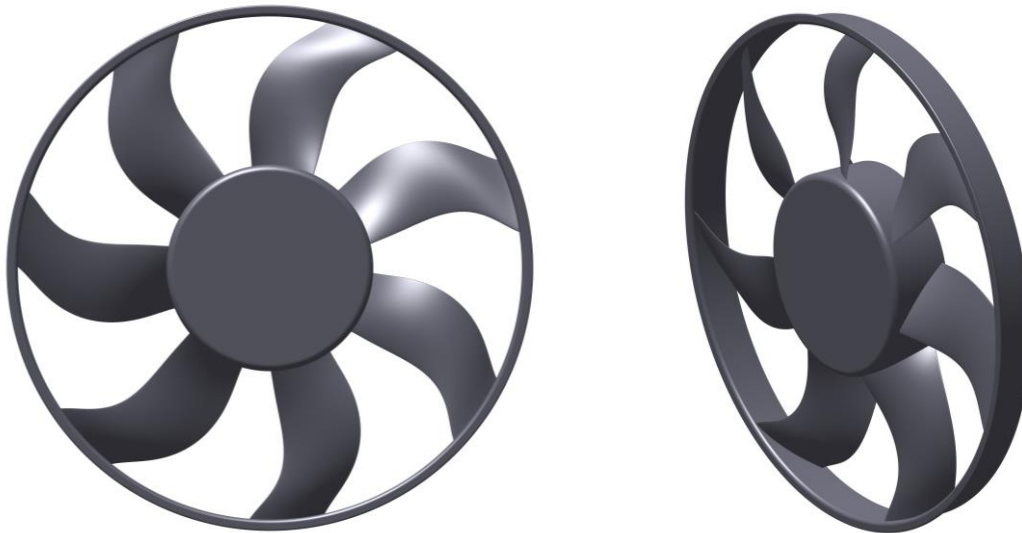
Typical rotor only automotive cooling fan rotor with forward swept blades
